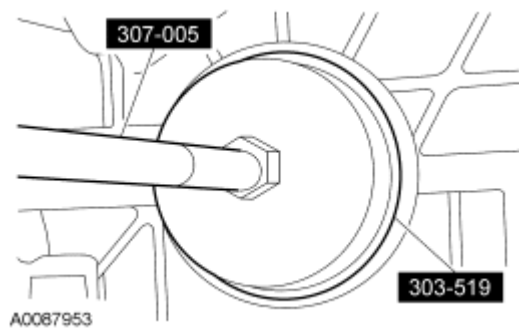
Identifying Special Tools (307-005 And 303-519)
